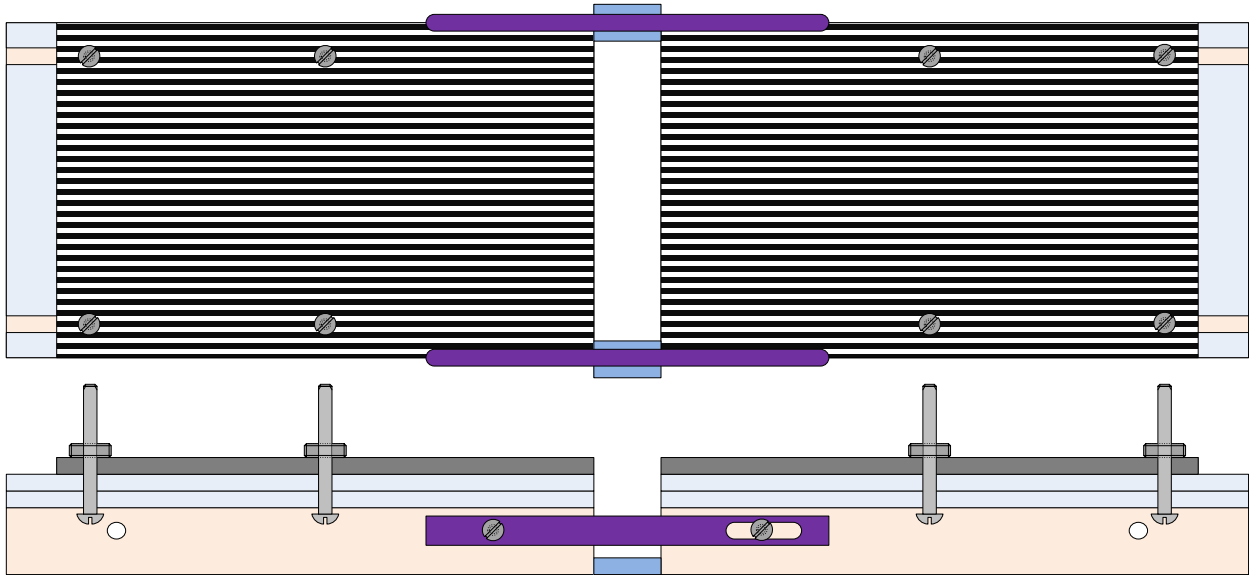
shows the schematics of a slab being assembled (i.e., assembling the base plate, spacer, and the macrotexture surface). Essentially, the assembly simply requires inserting a bolt through the holes (of the base plate and macrotexture surface) and the grooves (of the height spacer) and tightening it with a nut. Note again that once this is assembled, the spacer(s) can easily be inserted or removed by loosening the bolt/nut connection and sliding it sideways (without having to take out the macrotexture surface completely).
